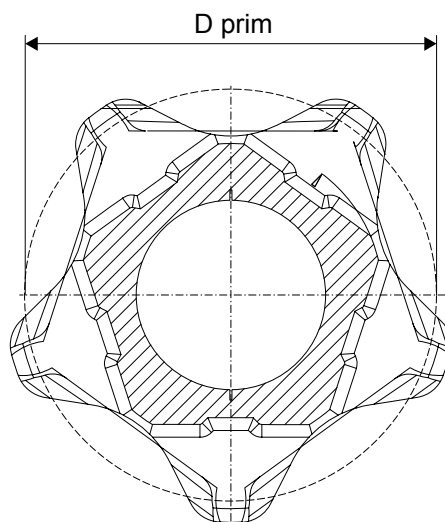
Dimensions of the chain sprocket; SL05-SL10, SR25
